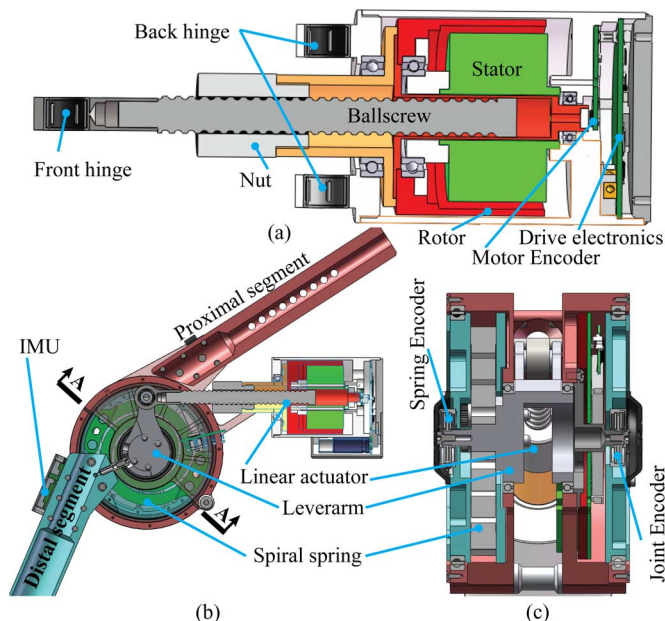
CAD drawing of the *MW* actuation system. (a) Construction of the linear actuator; (b) cross section (cut in the sagittal plane) of a series elastic joint; and (c) the A-A cross section of (b).
